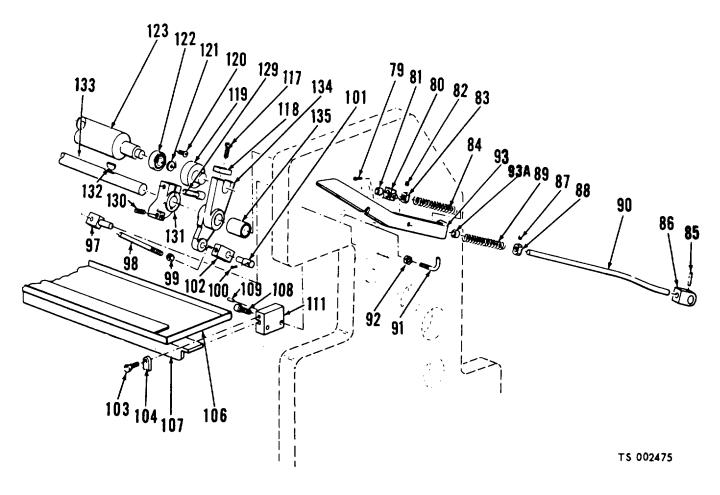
Ink motion assembly (Sheet 2 of 8).
